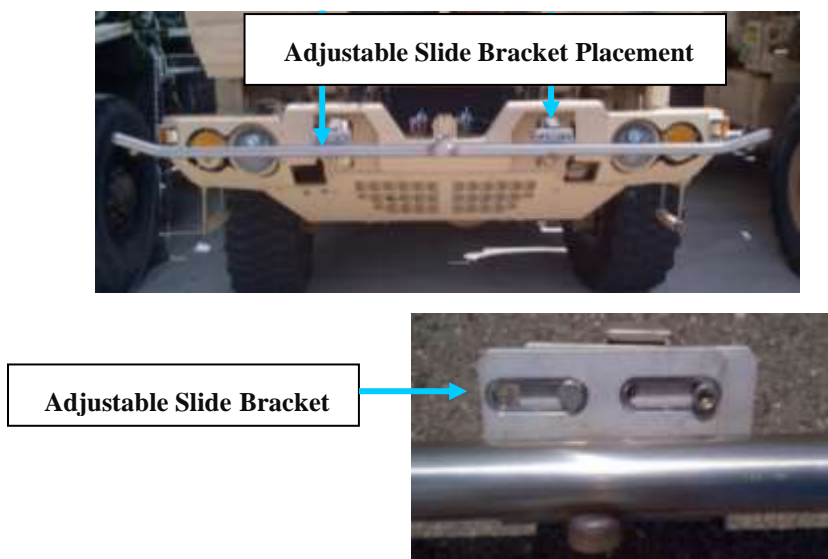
Adjustable Slide Bracket for Spray Bars (Front and Rear)
